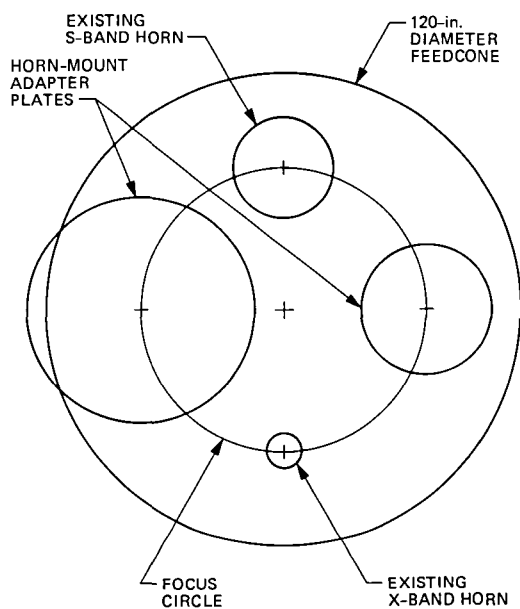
New design feedcone with adapter plates for mounting SETI feedhorns
